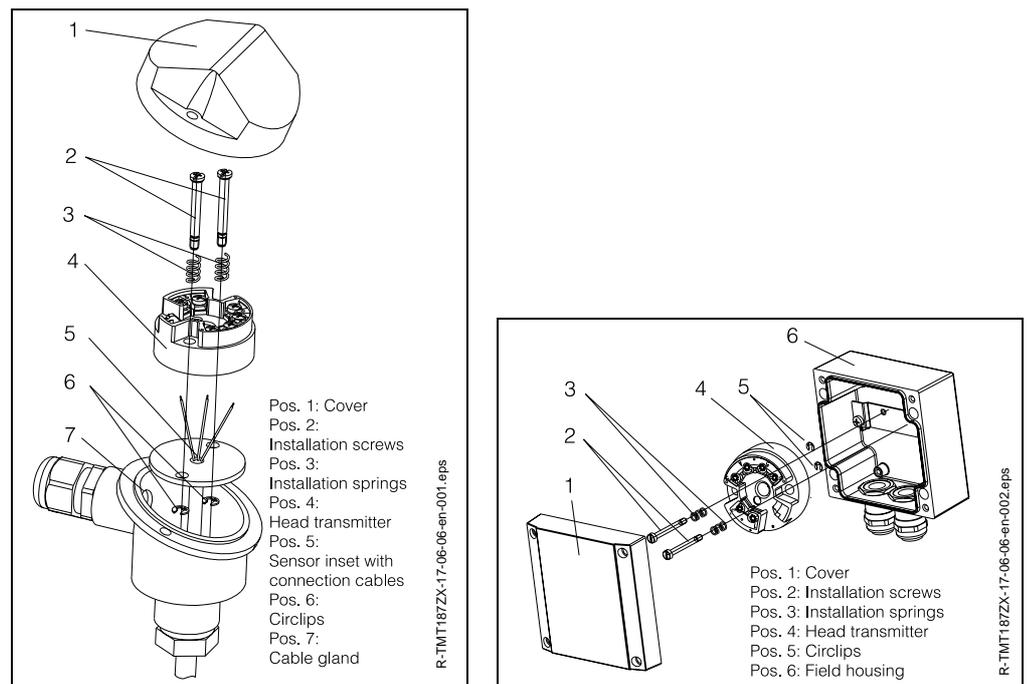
Installation of head transmitter into a Form B sensor connection head (left side) and a field housing (right side).
